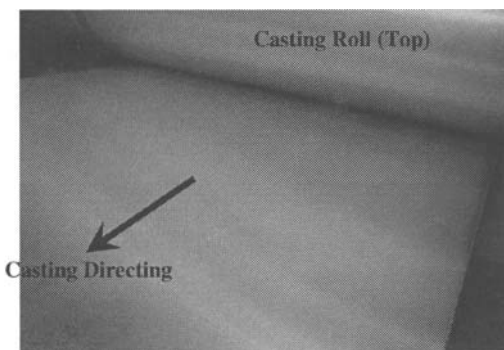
Strip casting process that magnesium strip is produced through the gap of a pair of casting rolls.
